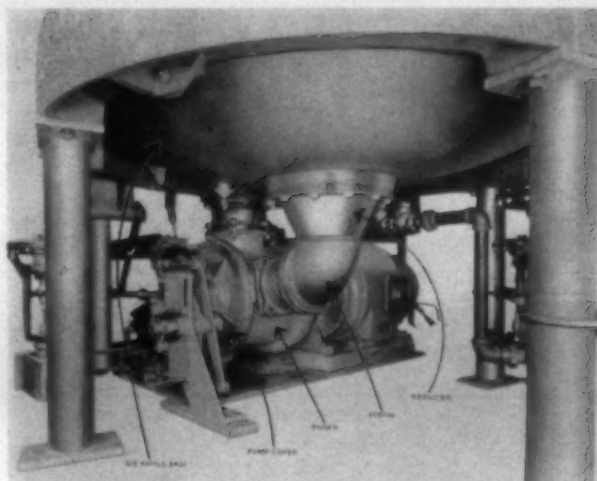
Underside of package dyeing machine reveals many parts made of type CF-8C and type CF-8 stainless castings. Pump cover, pump, elbow and reducer are made of type CF-8 castings; dye kettle is made of type CF-8C because of the welded construction. (Photo courtesy Smith, Drum & Co.)
